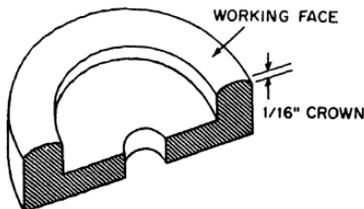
Crown on the working face of a wheel for a carbide tool bit grinder.
